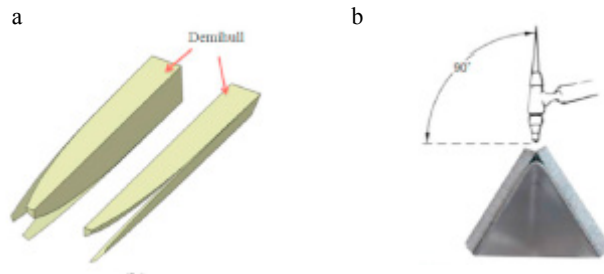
Catamaran hull geometry: (a) Catamaran design, and (b) Welding conditions on the hull (Honaryar et al., 2020).
